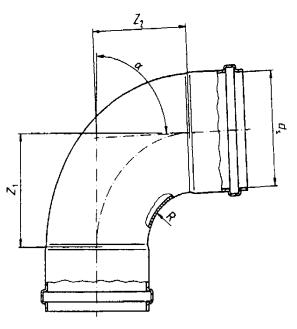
BEND WITH ALL SOCKETS (SWEPT)
